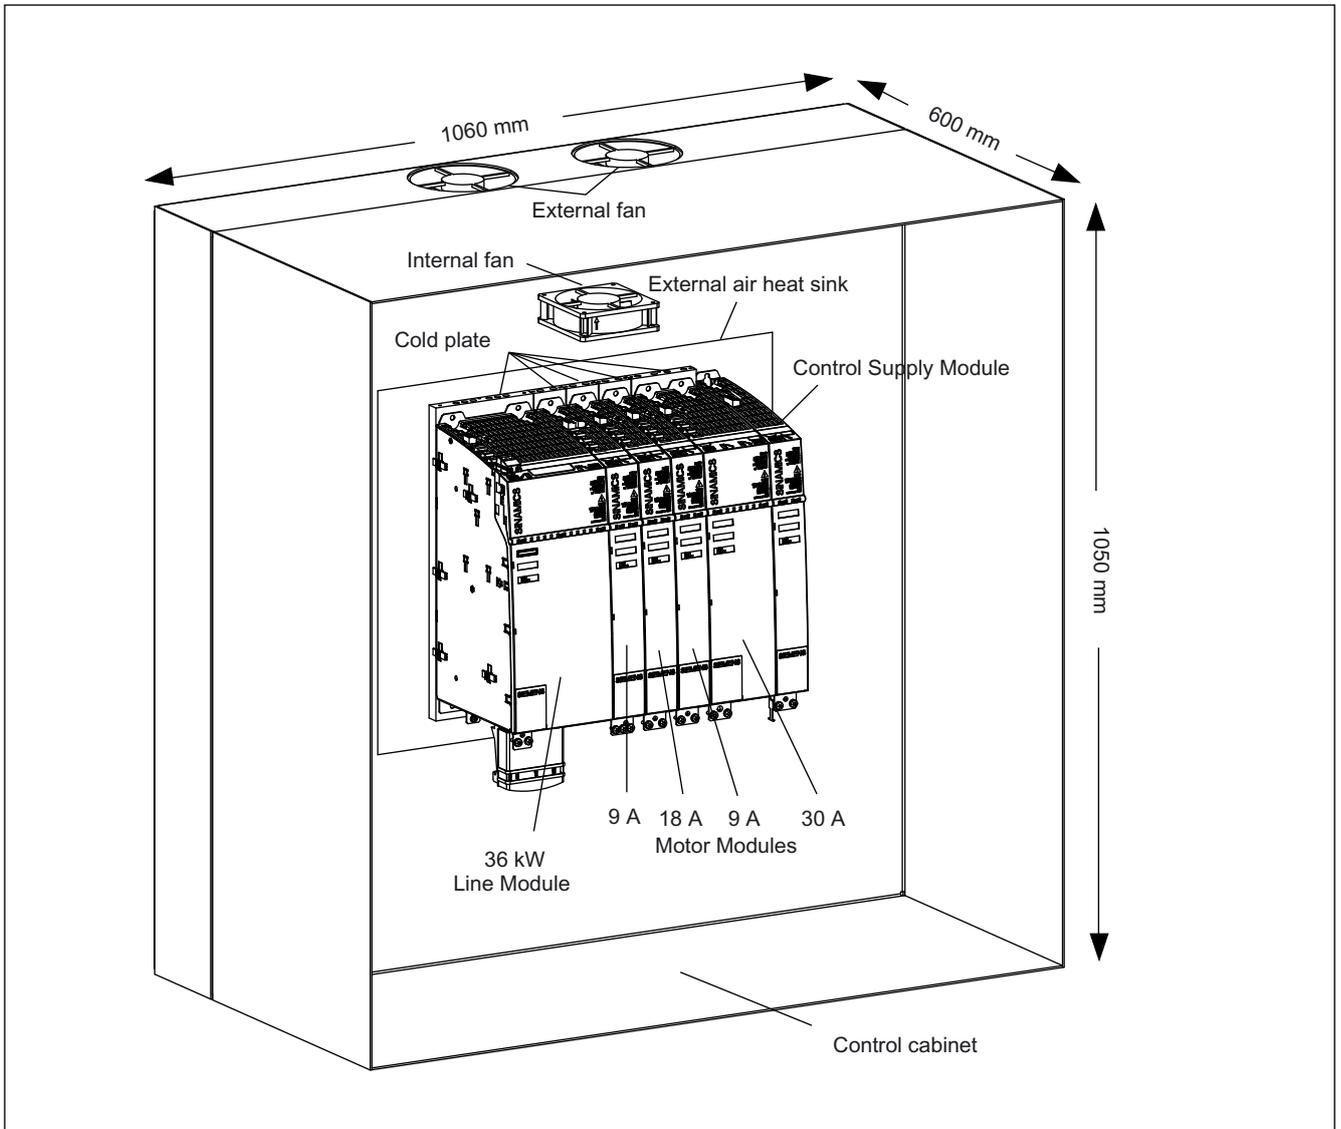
Example: cabinet setup with powers actions, cold plate, and external air heat sink
